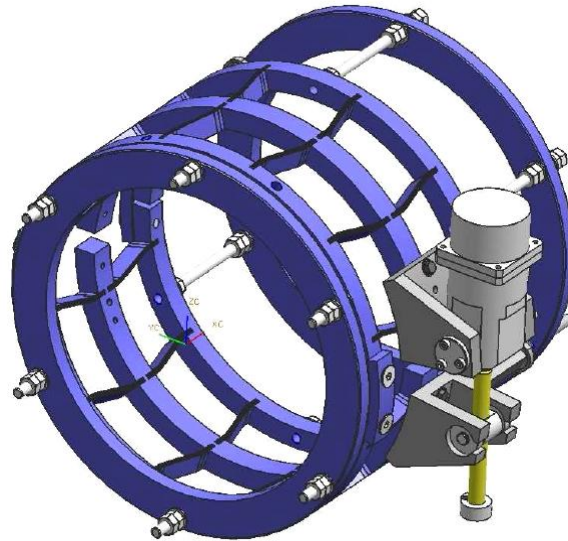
the new design of the Blade Tuner with the revised driving system
